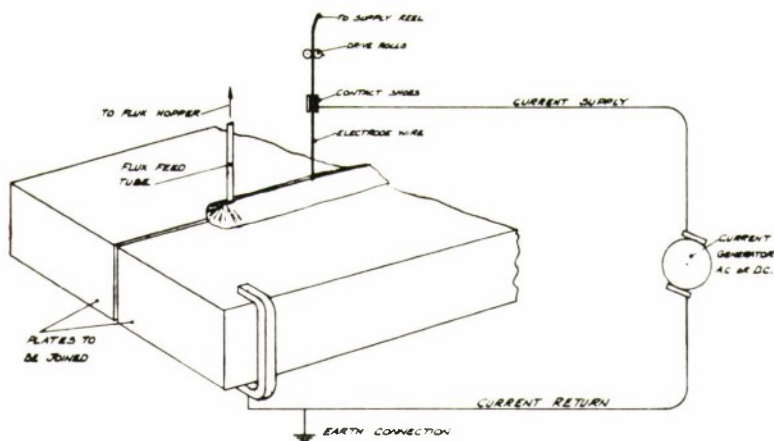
Typical arrangement for machine welding under flux cover.
